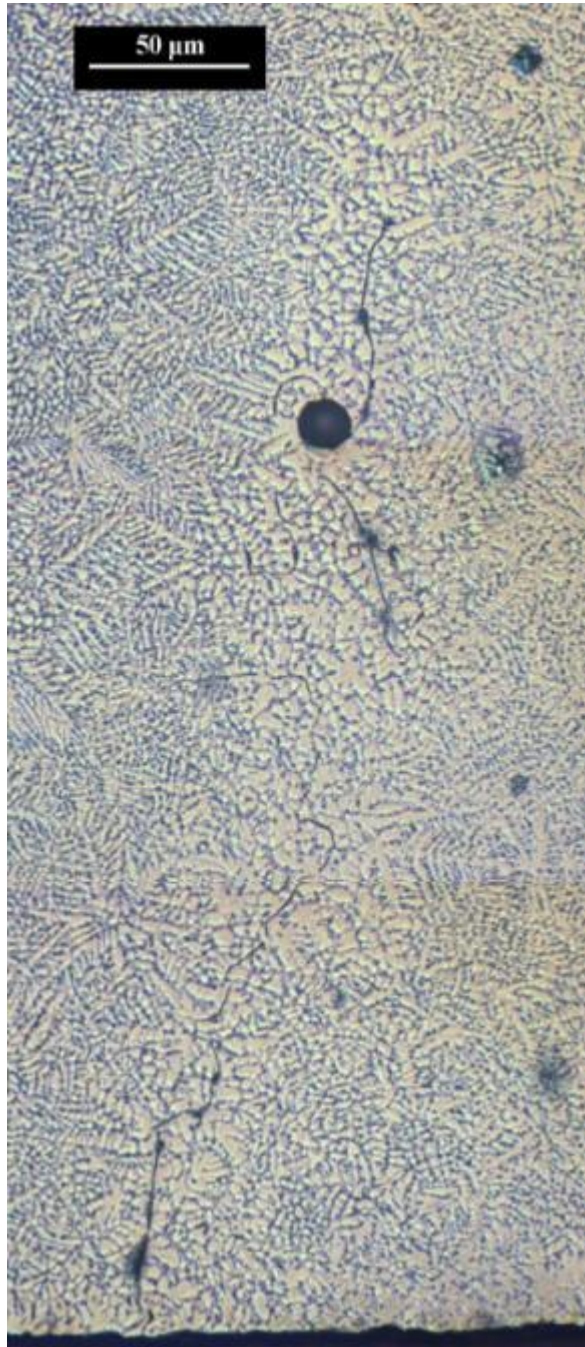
Cold Crack originating from the root surface in a 3 kW and 0.50 m/min diode laser weld.
